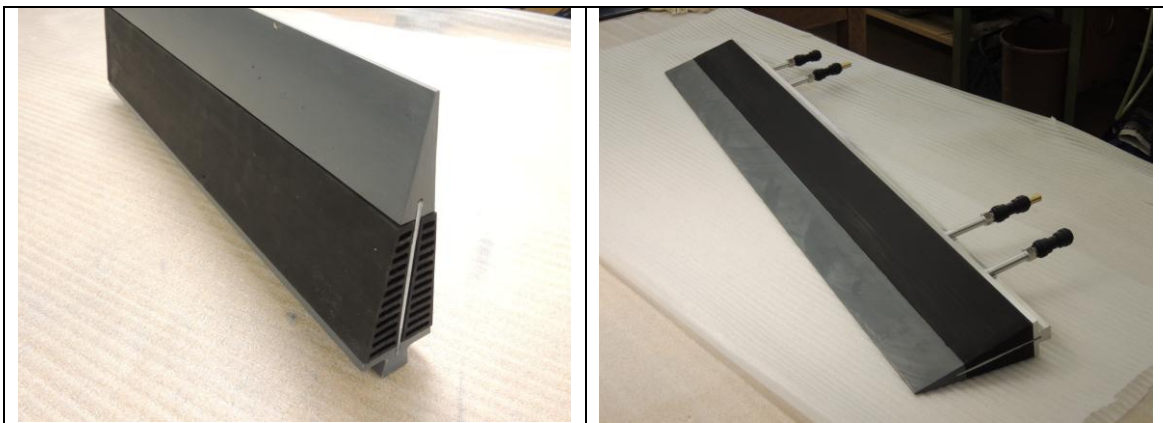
To the left the flap parts are assembled but not glued together (non metallic flap version). To the right a fully assembled flap with a few metal parts
